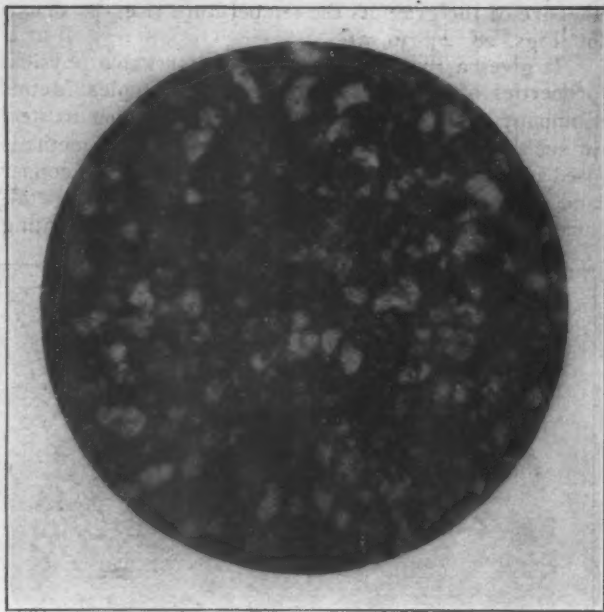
A 3/8 in. Copper-Clad Rod, with Three Compounds Visible in the Weld Area.
